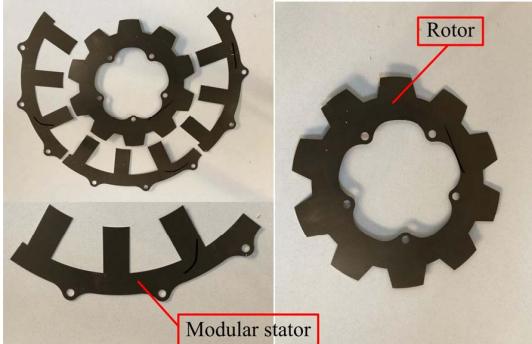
Laser cut manufactured M400-50A electrical steel laminations of the proposed DC-VRM wind generator prototype – OBD-II.
